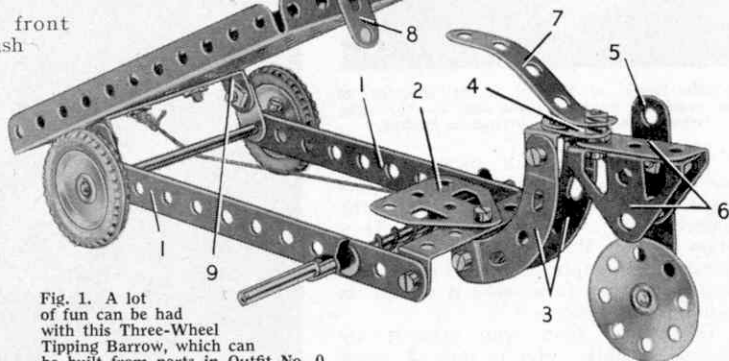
A lot of fun can be had with this Three-Wheel Tipping Barrow, which can be built from parts in Outfit No. 0.
